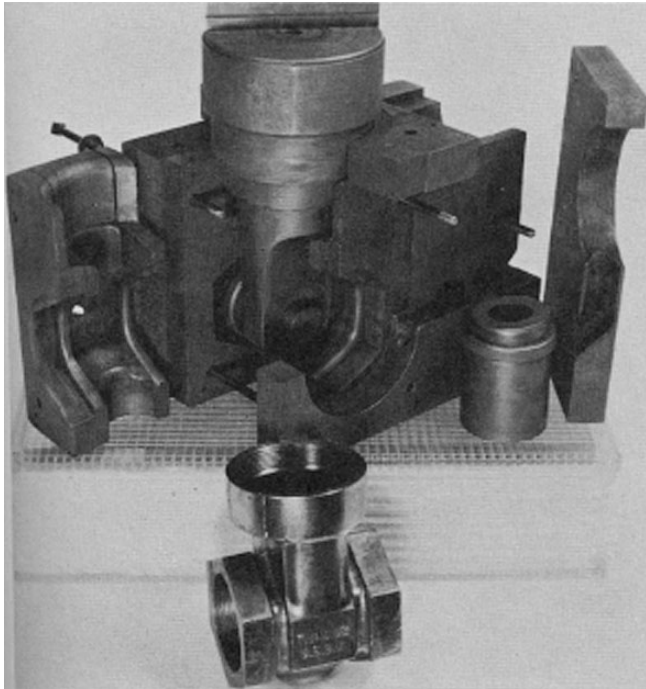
An intricate "laminated" graphite mold with a resulting titanium gate valve casting is shown above.
